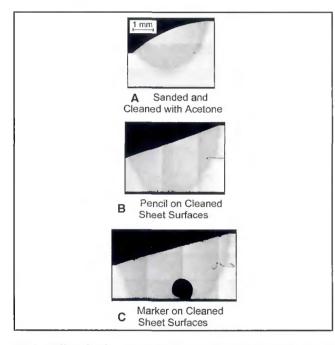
Effect of surface coatings on fillet welds in lap joints, 1.5-mm-thick aluminum Alloy 5182 at 1 m/min.
